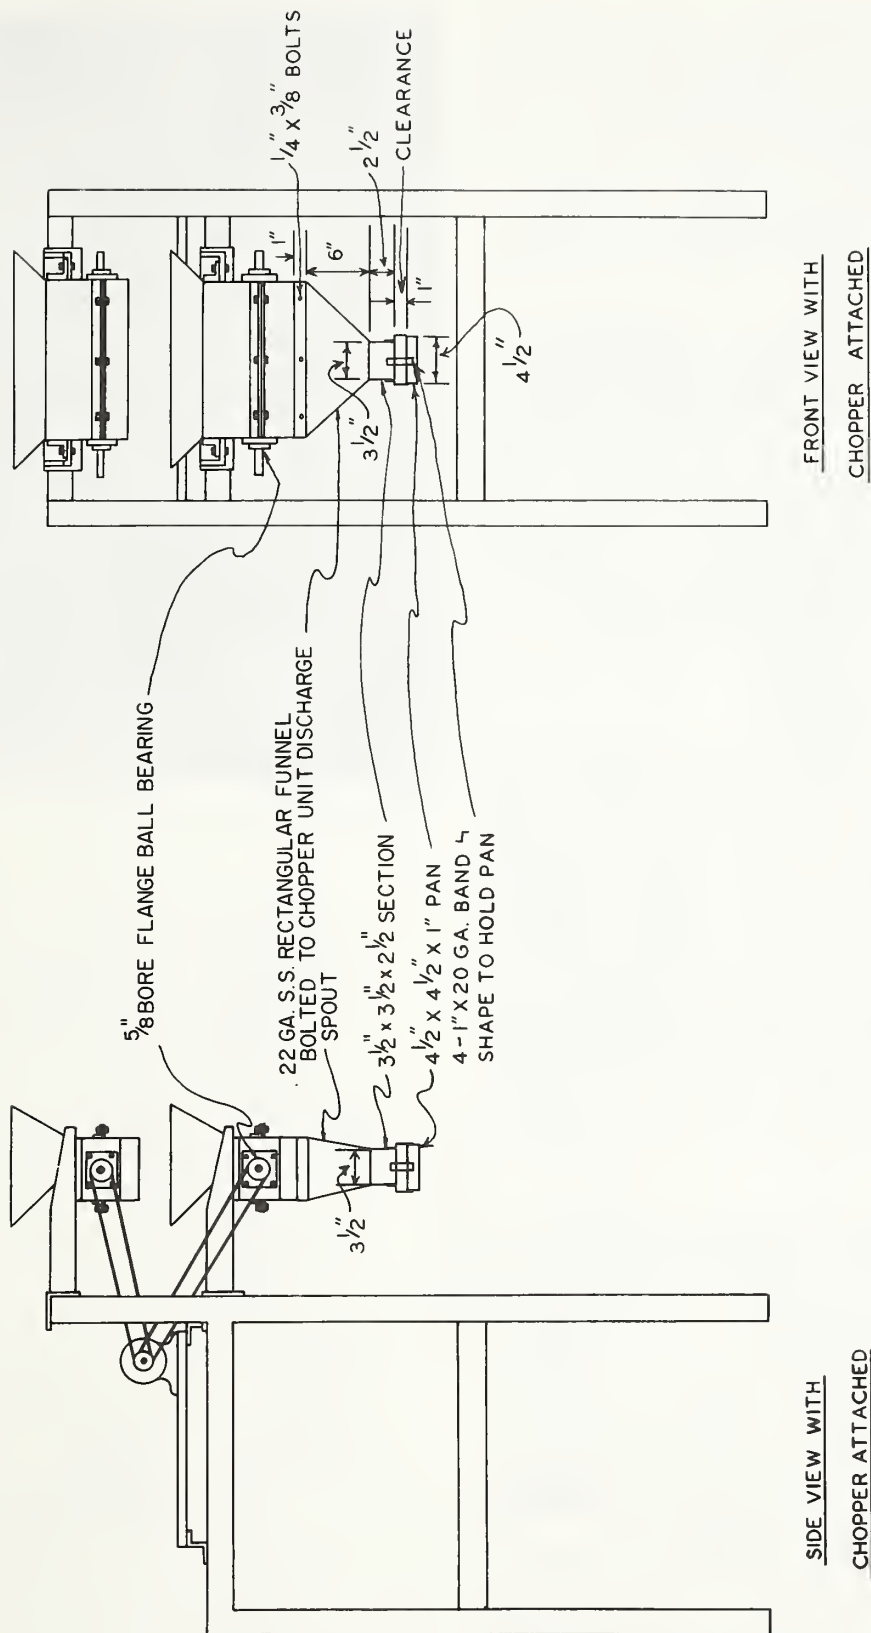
Schematic diagram of pellet-chopper assembly.
